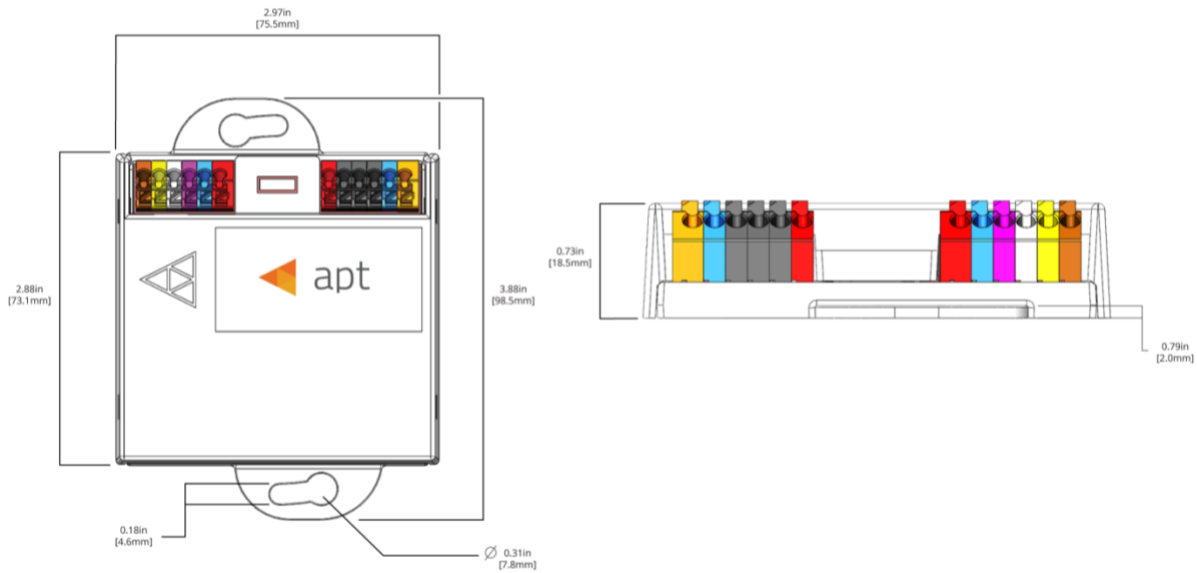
APT-CV4-Vx-SQ Mechanical Drawing
